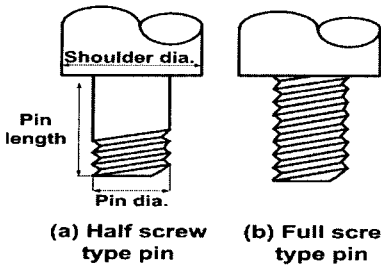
Schematic diagram of tool for friction stir welding
